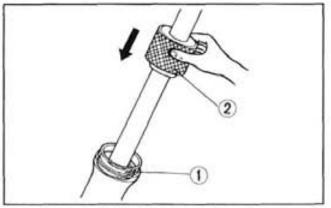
(i) Oil seal (2) Fork seal driver
